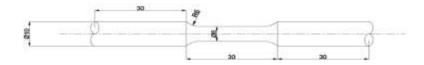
Specimen for Tensile test (dimensions are taken in milimeter)
